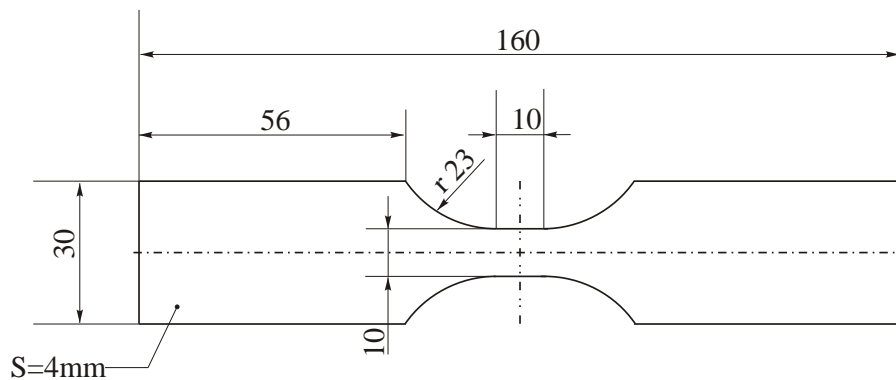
Flat specimen geometry extracted from 4 mm sheet used in the fatigue tests
